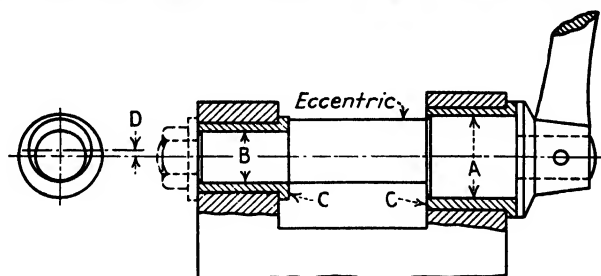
Eccentric-pin clamp, removable or with nut.
